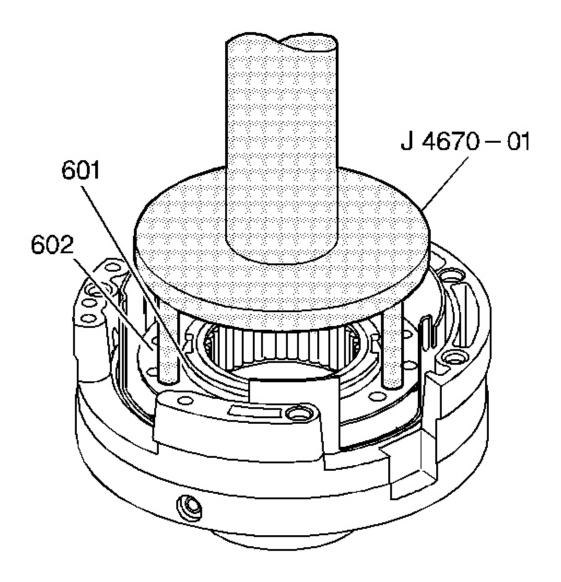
Using J 4670-01 To Compress The Fourth Clutch Spring Assembly Courtesy of GENERAL MOTORS CORP.
